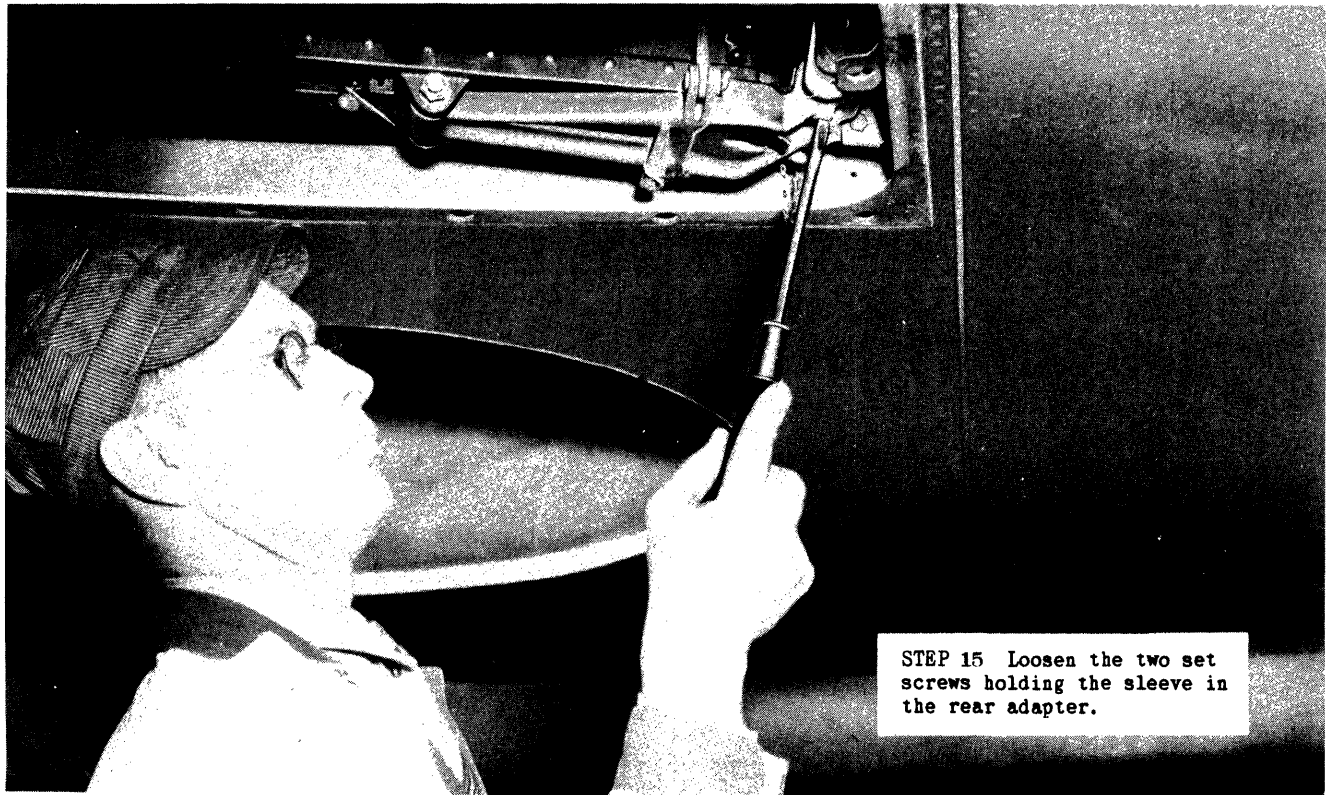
Bore-Sighting Guns - Target Method (Sheet 7 of 8 Sheets)
